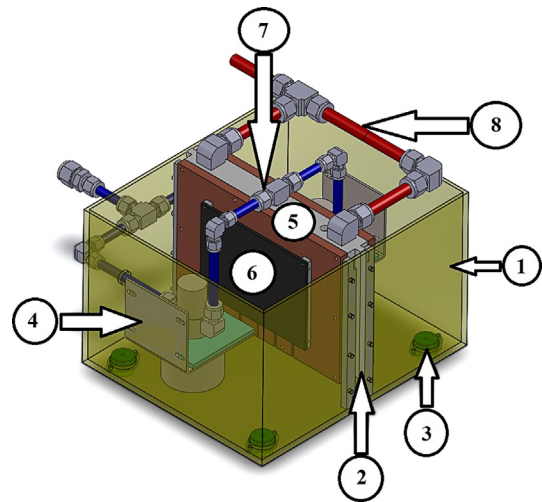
CAD model of the ATR chassis with all the included components: 1. chassis, 2. wedge locks, 3. isolators, 4. micro pumps, 5. cooling chamber, 6. heating boards, 7. inlet tubing, 8. outlet tubing.
